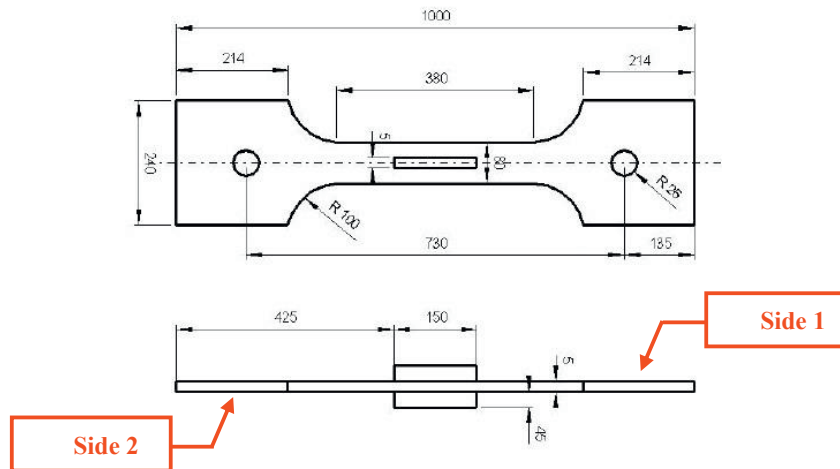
Design and dimensions of longitudinal stiffener fillet welded joint
